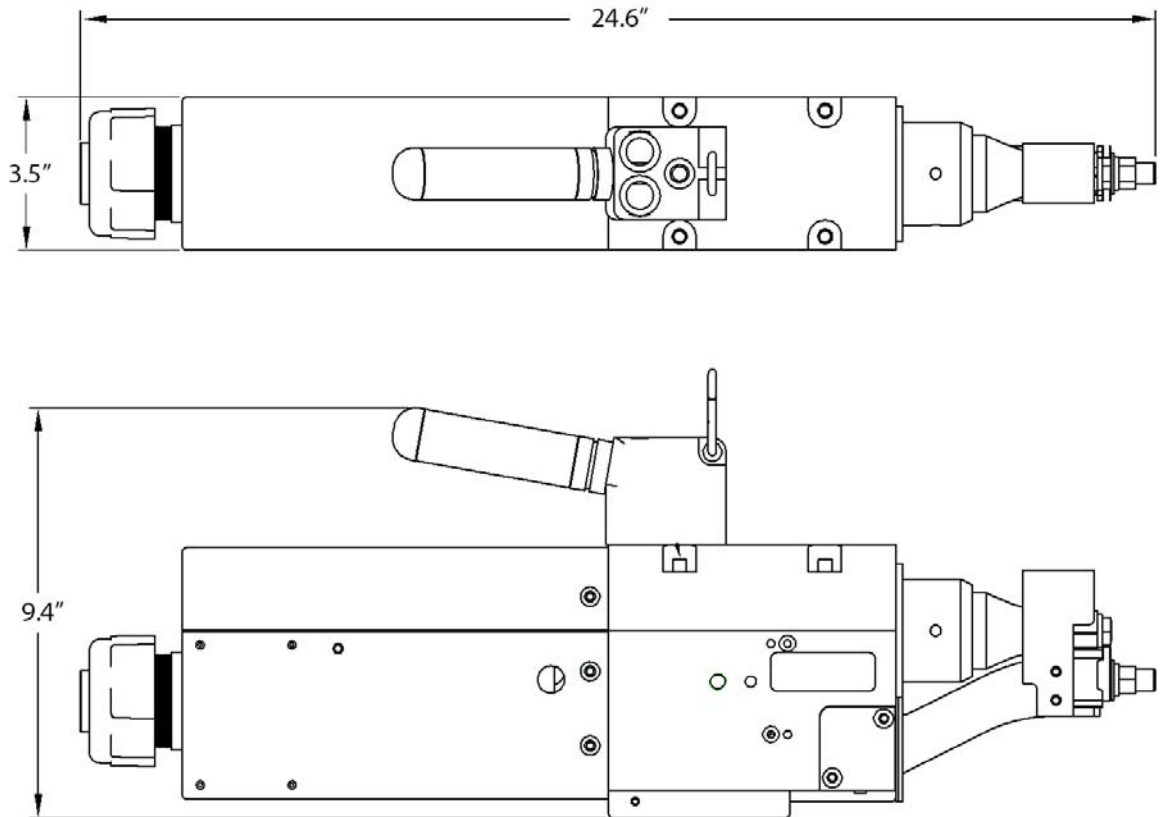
Controller Dimensional Drawing (VersaGraphiX)
